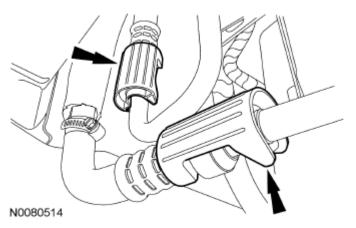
Locating Secondary Latches Of Transaxle Fluid Cooler Tubes
